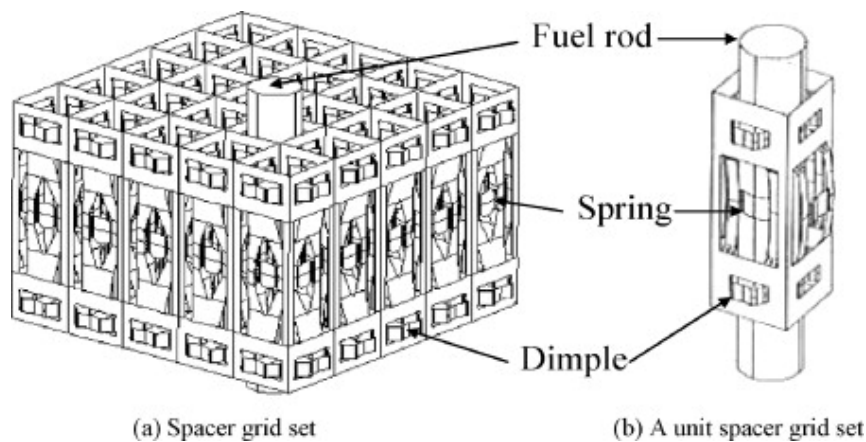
Section of a spacer grid (a) and unit spacer grid set (b). Springs and dimples keep the fuel rods in position [Shin et al., 2008].
